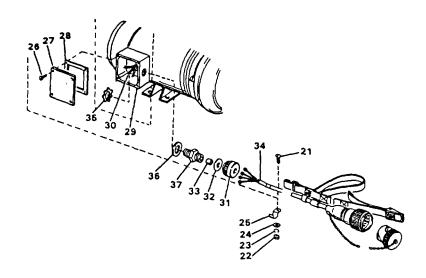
Distribution Pump and Motor Assembly (sheet 5 of 5)
